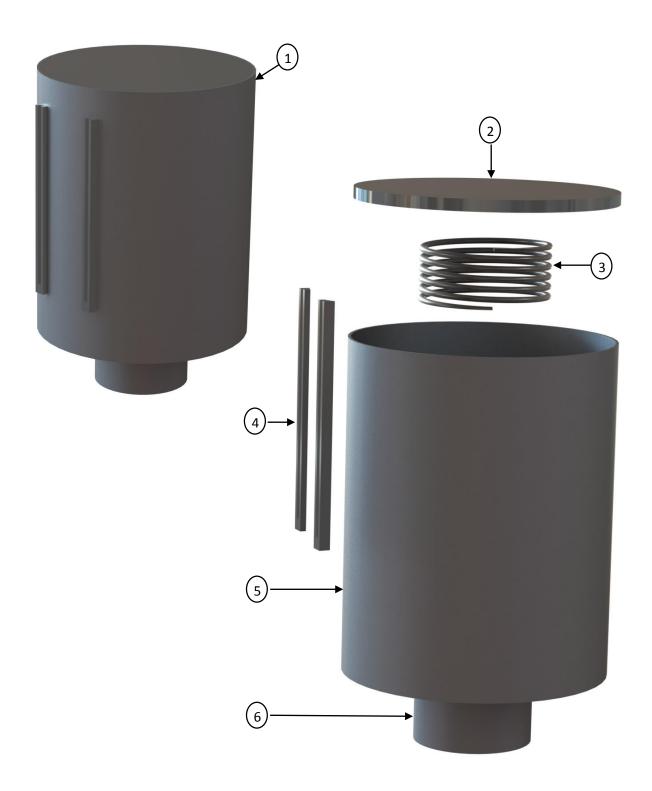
Rendering of the outer casing. 1) Outer casing, 2) upper endcap with threads (not visible), 3) top spring, 4) mounting rails for the power source, 5) outer casing sylinder, entry guide for the post. As the piston never goes past the spring, there is room for the electrical control unit at the top end cap, around the top spring. This also makes it easier with the cable routing to the battery, as there is no movement between the outer casing and the battery. This means that the flexible cable connection must be between the electrical control unit and the windings in the stator.
